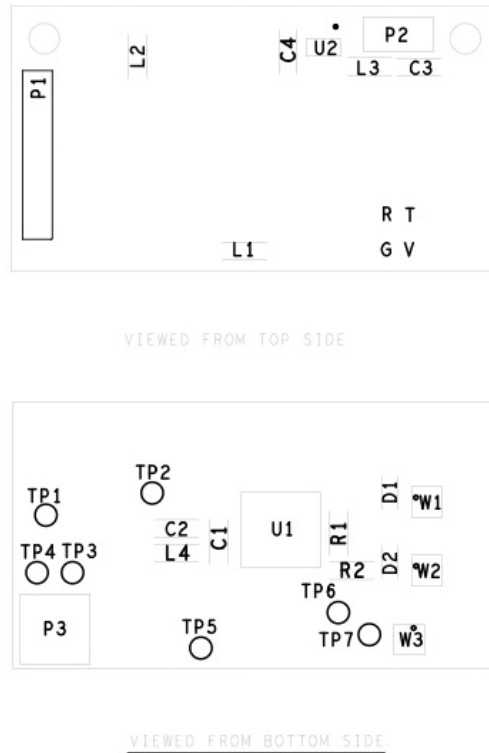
Assembly Top and Bottom for BMD101 Starter Kit Module Ver 1.3
